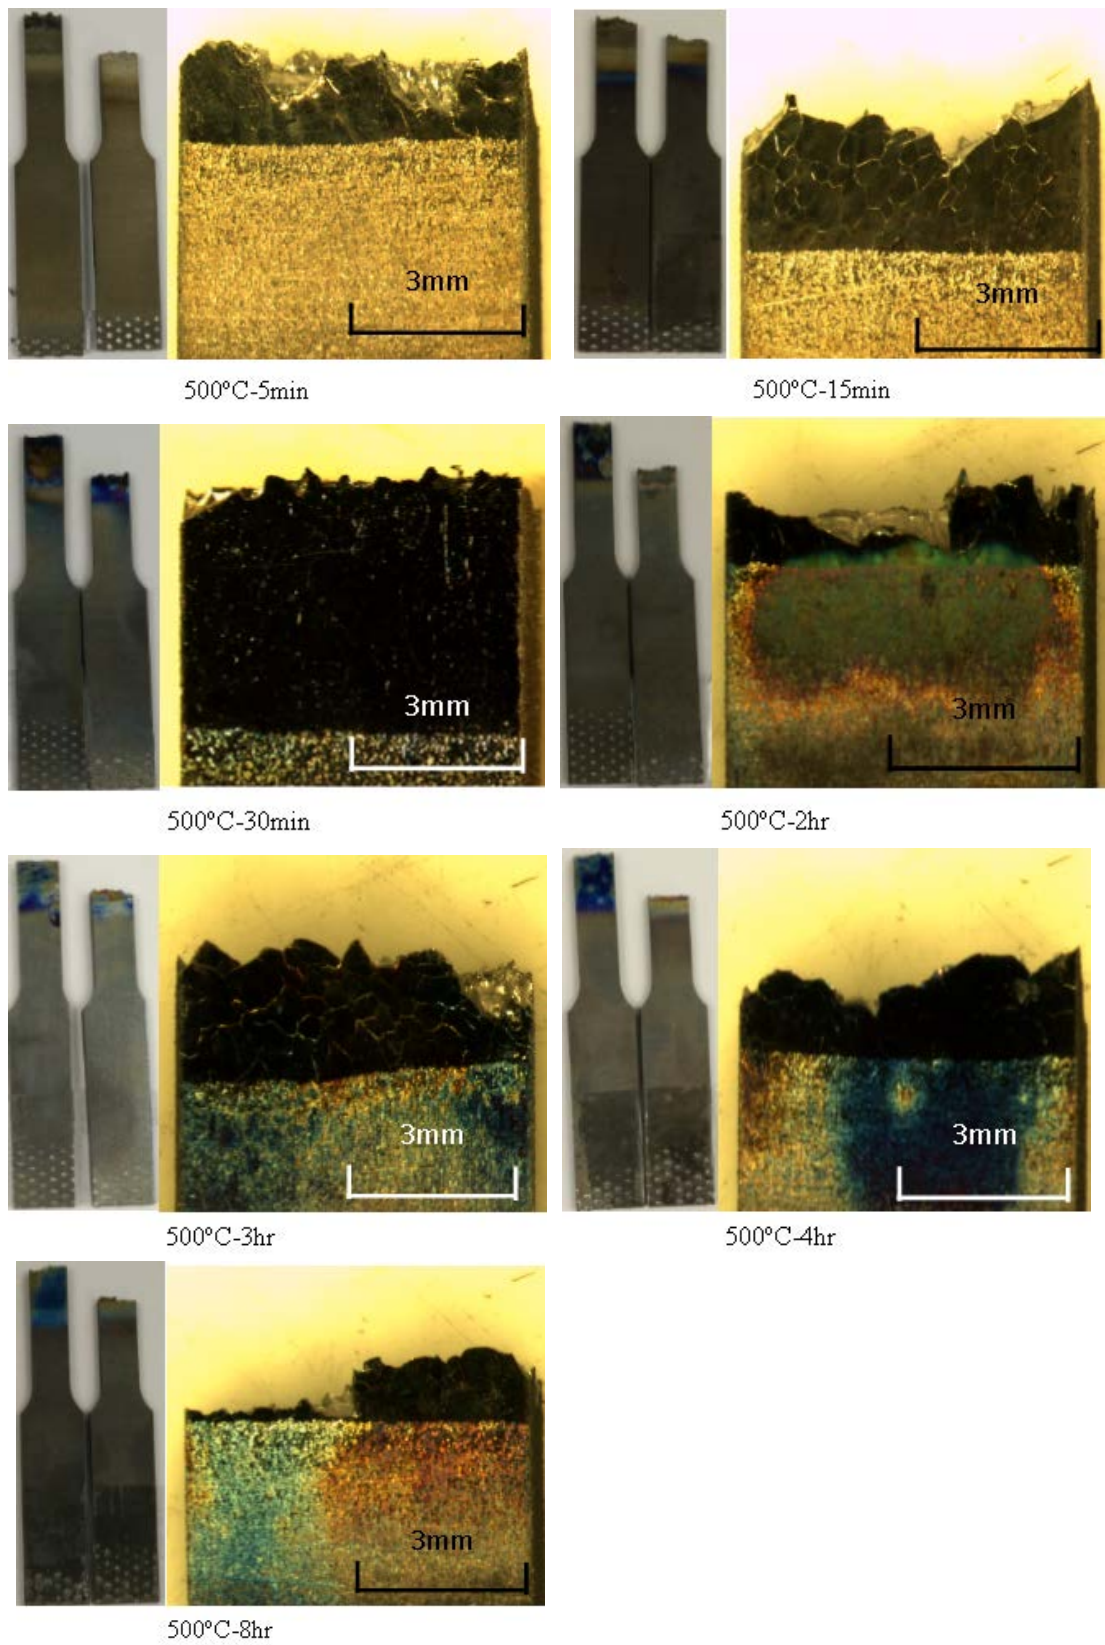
Macrographs of the broken test pieces and the fracture locations of specimens aged at 500°C after tensile test
